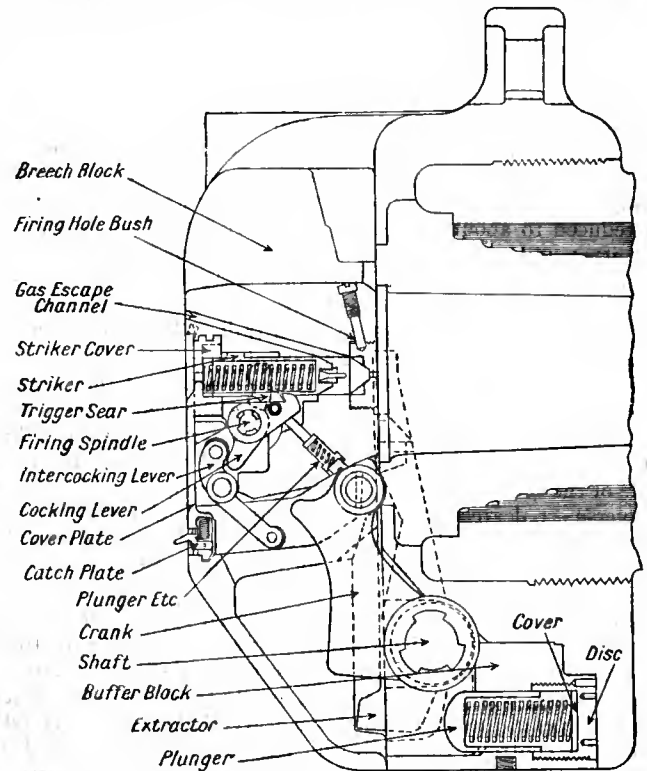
Section of breech end of Q.F. 3-in. 20 cwt. Mark I. Gun.
